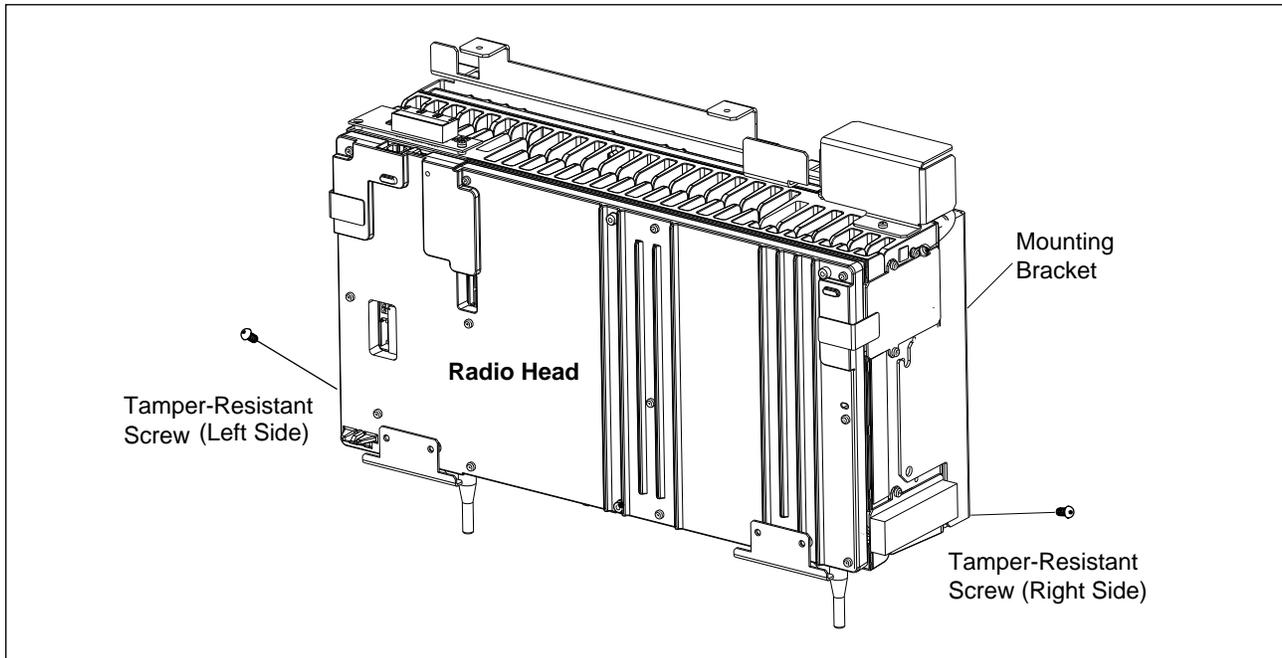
Radio Head with Mounting Bracket and Mounting Screws
